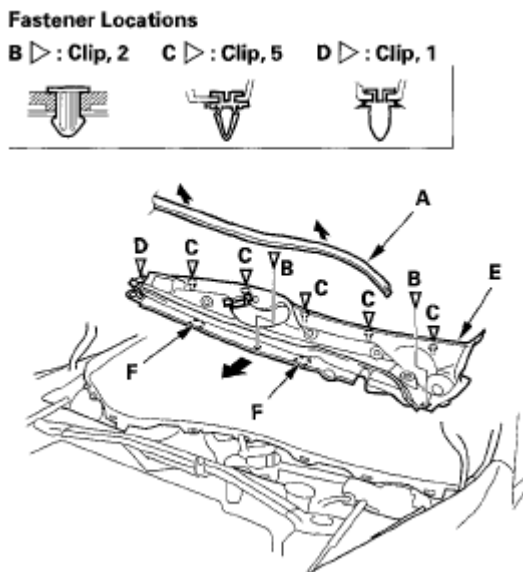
Identifying Driver's Cowl Cover, Rear Hood Seal And Hooks
